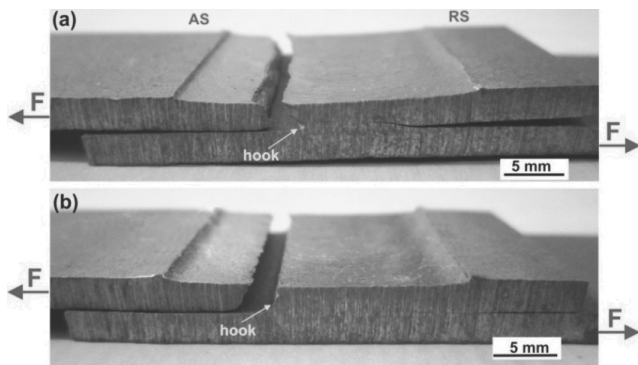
Tensile-shear tested samples of AZ31B welds displaying fracture in hook location (top: $h = 0.28$ mm, and bottom: $h = 1.34$ mm)
